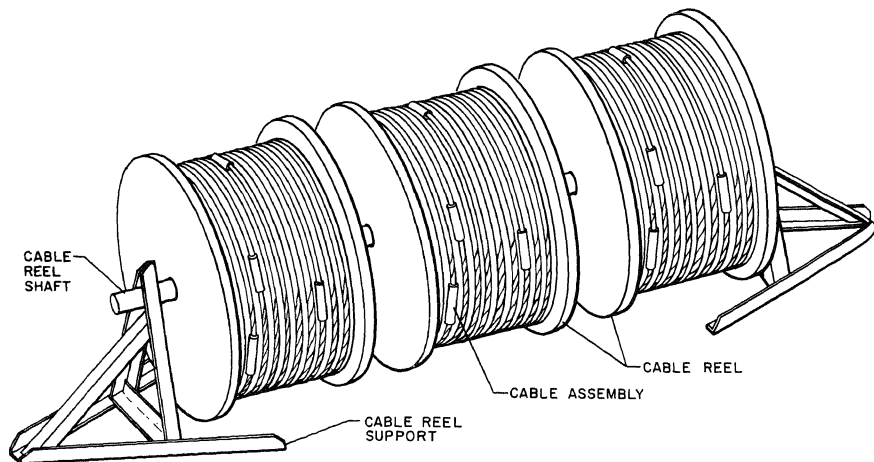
Cable assemblies installed on cable reels and cable reel supports.
